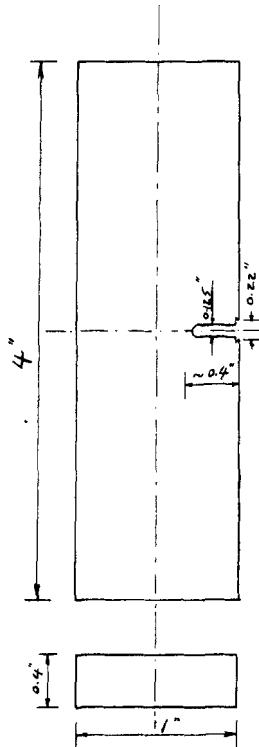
Single-Edge-Crack Specimen Geometry used for Fracture Toughness (K_{Ic}) Measurements.
